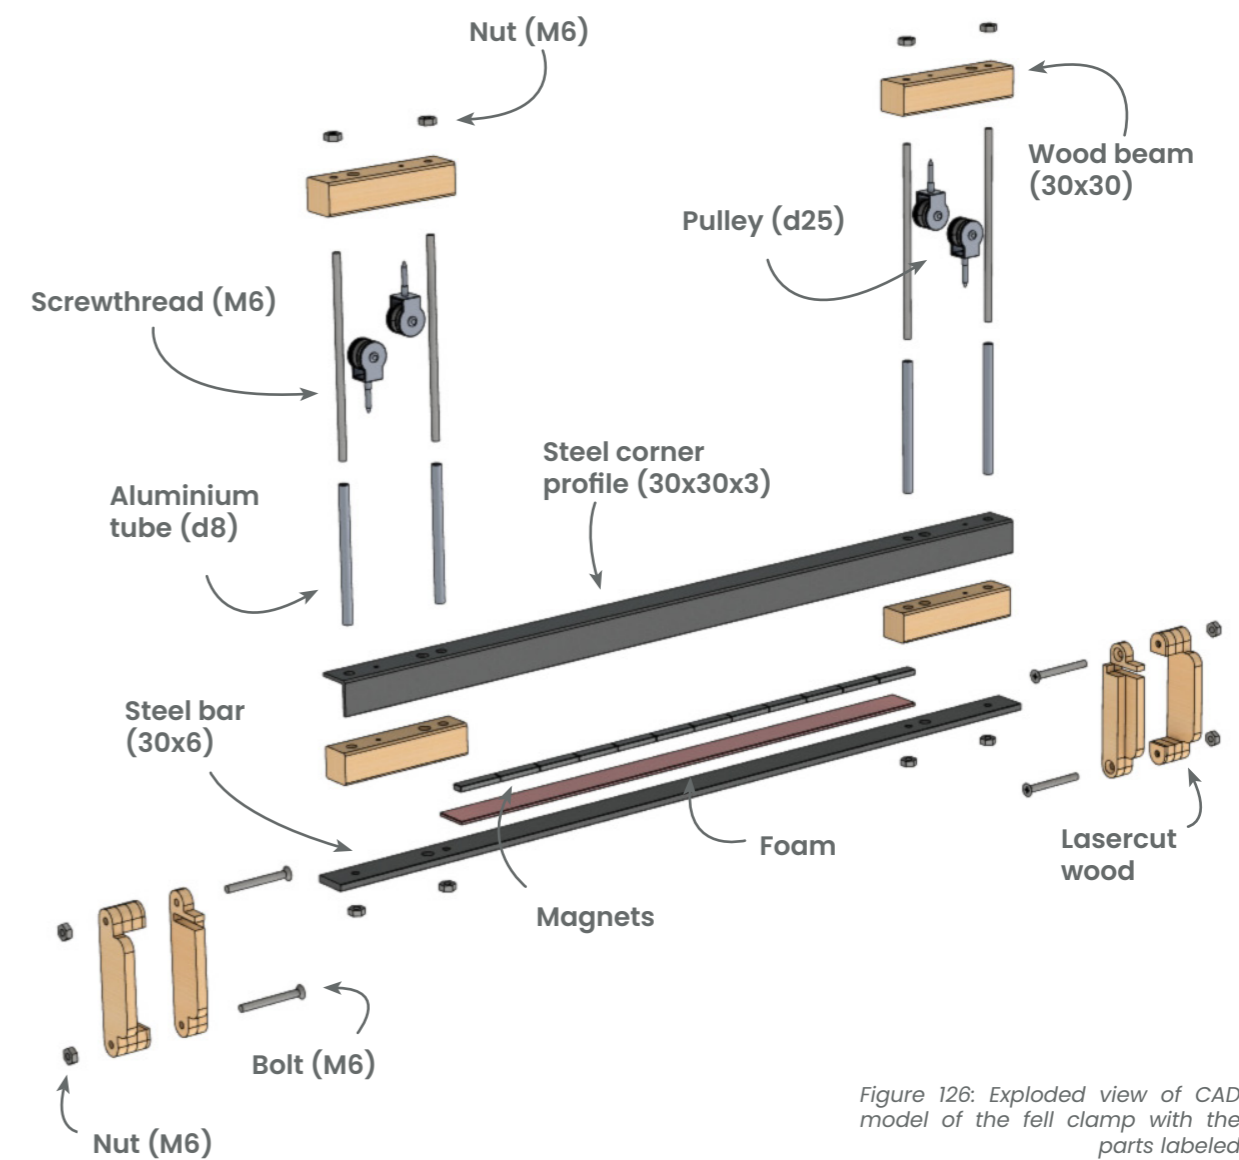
Exploded view of CAD model of the fell clamp with the parts labeled
